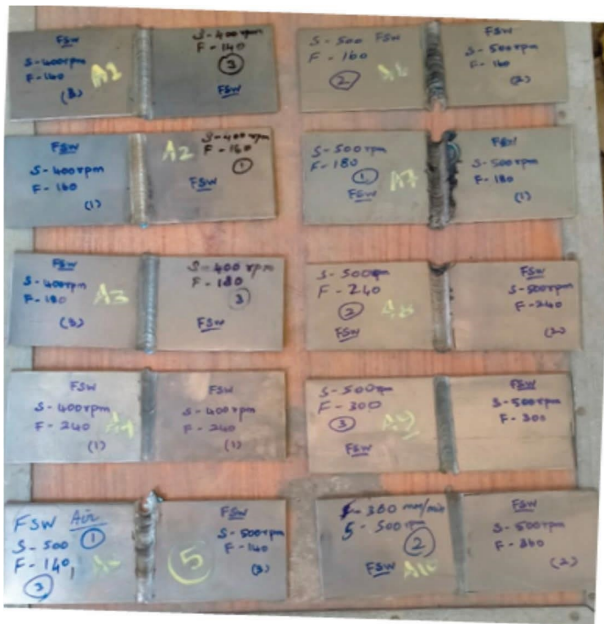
Friction stir welded joints at different process parameters.
